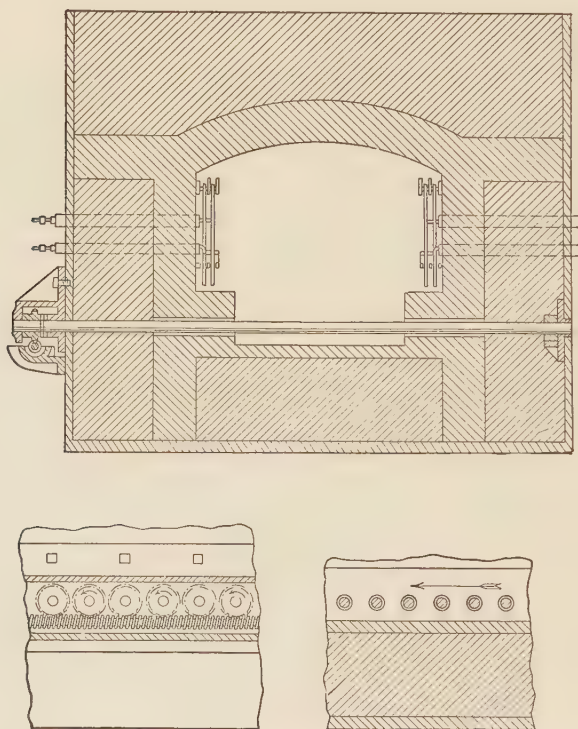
Roller conveyor in electrically heated furnace. The rollers are made of heat-resisting metal.
